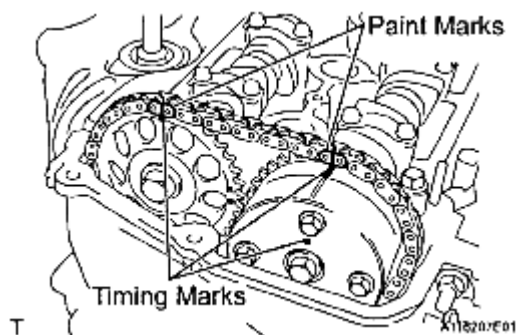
Identifying Paint Marks And Timing Marks Of Camshaft Timing Sprocket
